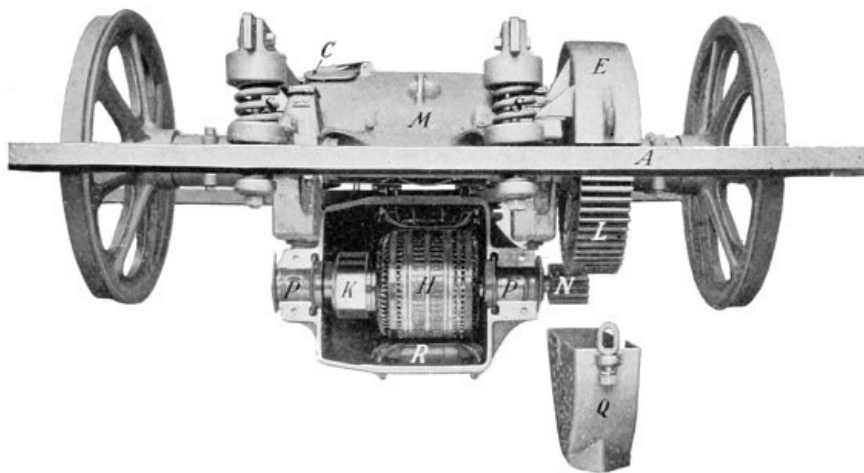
RAILWAY MOTOR WITH CASING OPEN, SHOWING ARMATURE IN LOWER HALF.
